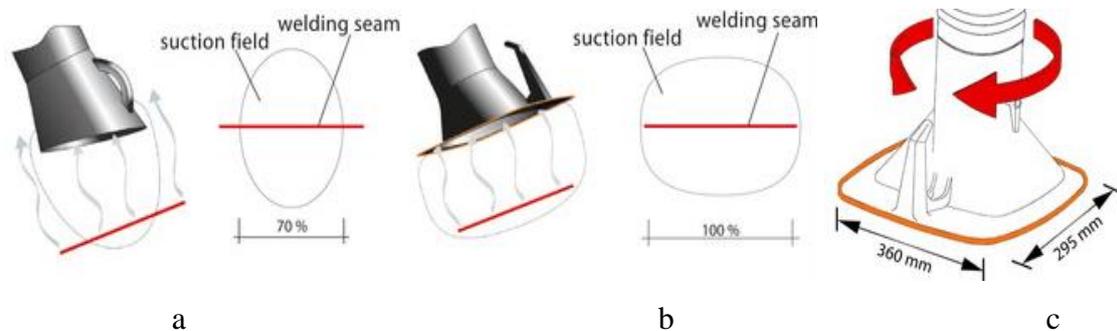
The exhaust hood designs. (a) Conventional oval exhaust hood. (b) Exhaust hood with flange shaped overlap. (c) Exhaust hood dimensions (Timings, 2008).
